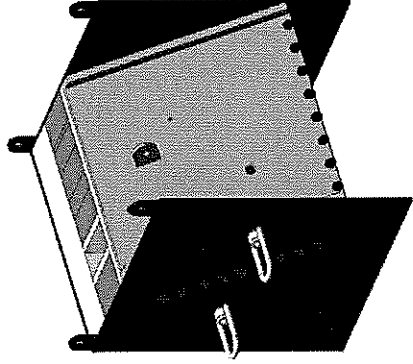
RENDER OF THE COMPLETELY ASSEMBLED MOLD.
